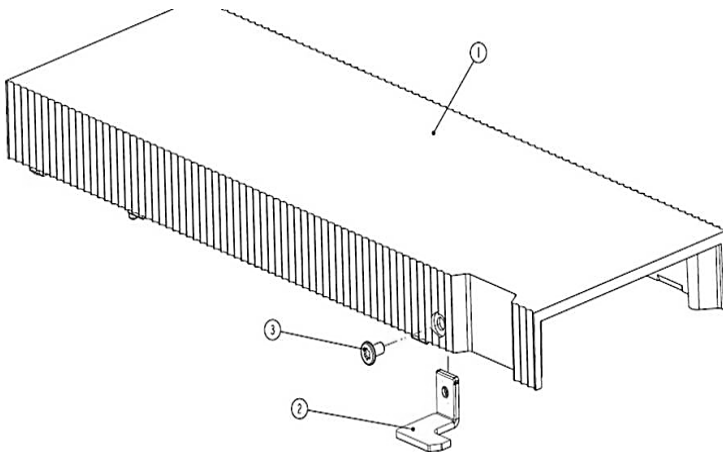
NVIDIA A2 Removable Hockey Stick Tab Assembly
